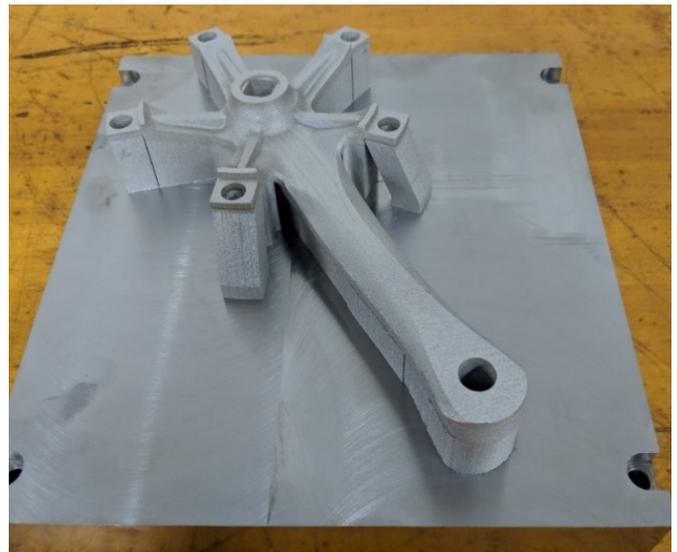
Parts were printed using an EOS 290, 3D metal printer
